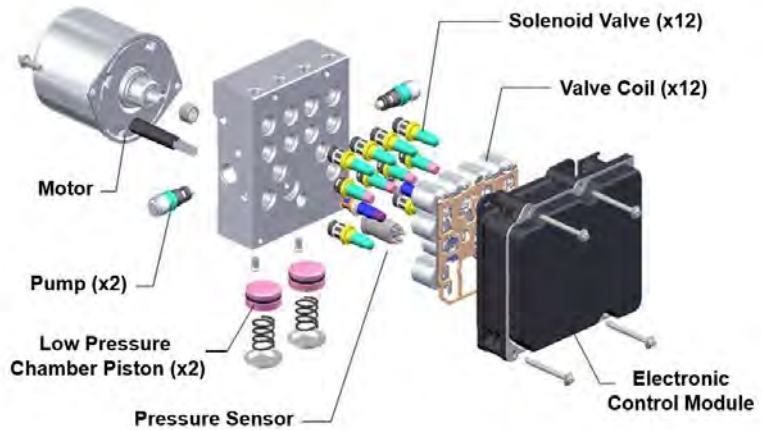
Expanded view of Bosch's ESP hev II unit showing its internal components.²⁰
